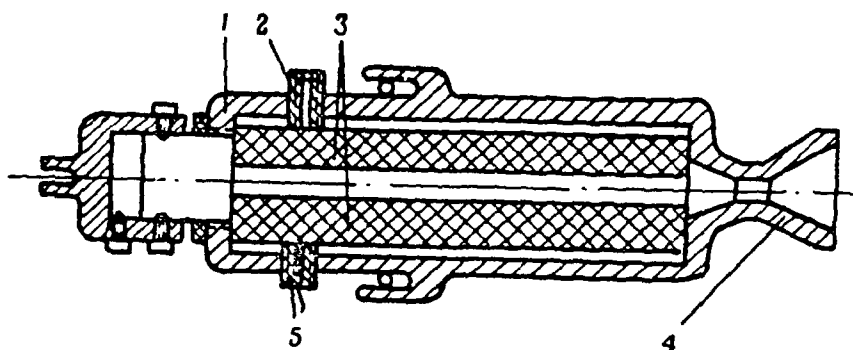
Schematic diagram of a solid-propellant rocket engine: 1 - housing; 2 - safety valve; 3 - solid-propellant grain; 4 - nozzle; 5 - device for burning.
